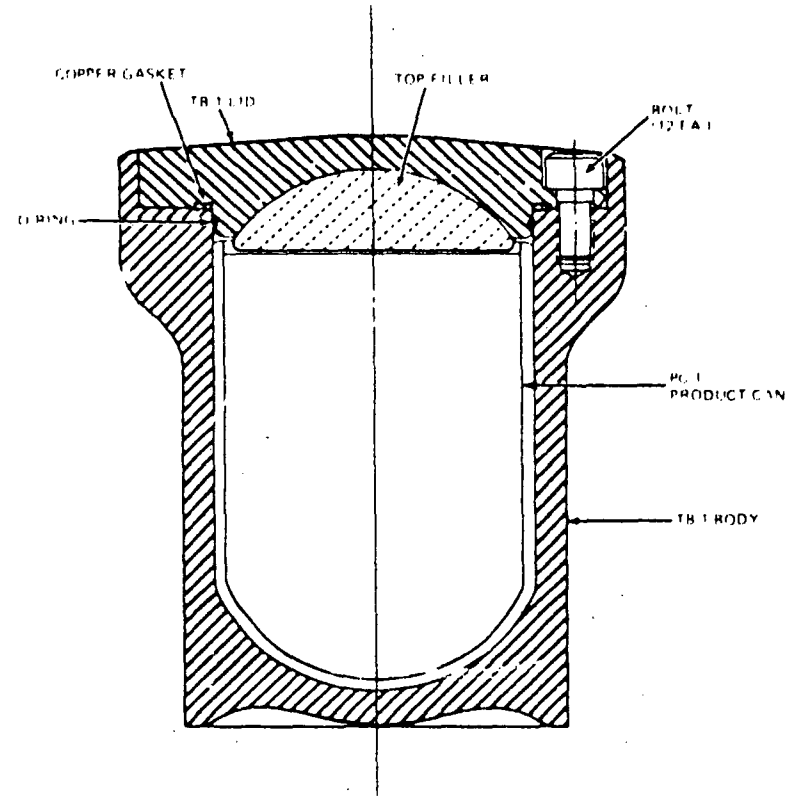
E Cutaway Drawing of TB-1 Containment Vessel
